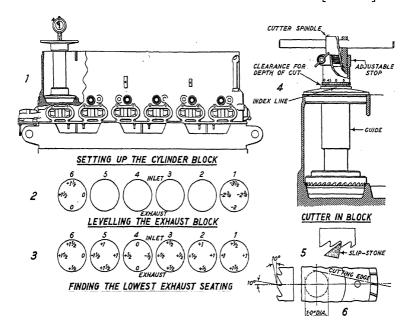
LEVELLING SEATINGS FOR CYLINDER LINERS.
